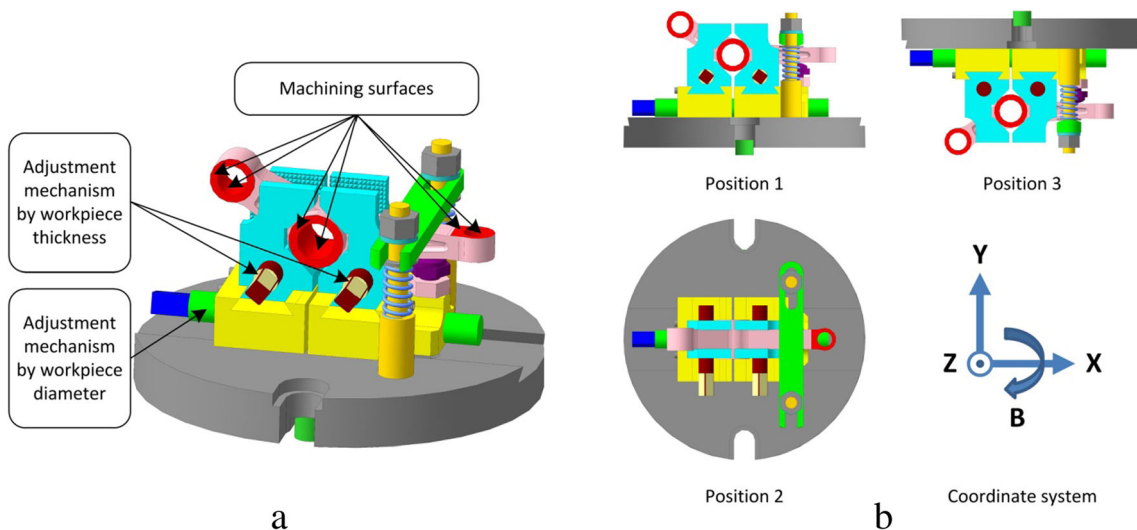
Adjustable locating-and-clamping module (a) and cut-map for lever machining on the CNC multiaxis machining operation (b)
